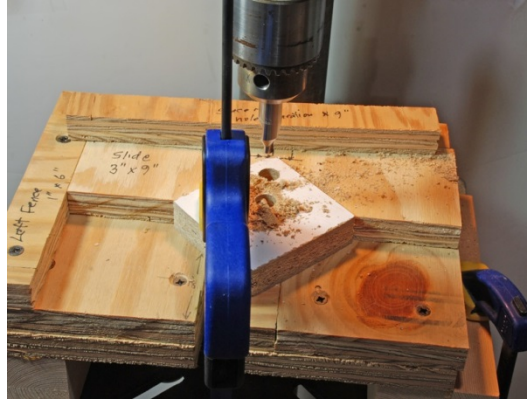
Testing the hole separation by drilling a second hole with the Spacer removed.
